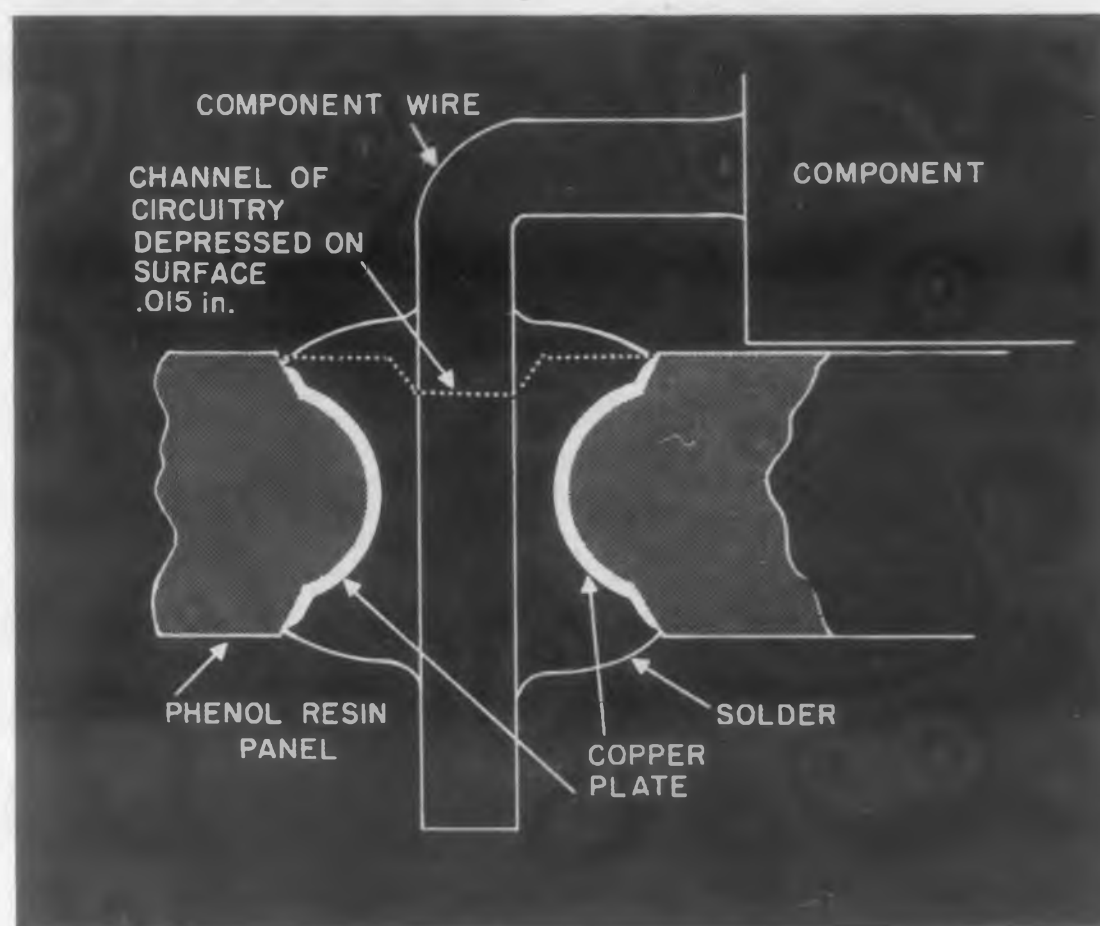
Enlarged cross-section of molded panel showing how components are inserted and anchored by solder. The hour-glass shaped holes result in uniform copper deposition and forms an "eyelet" integral with the channel circuitry.
